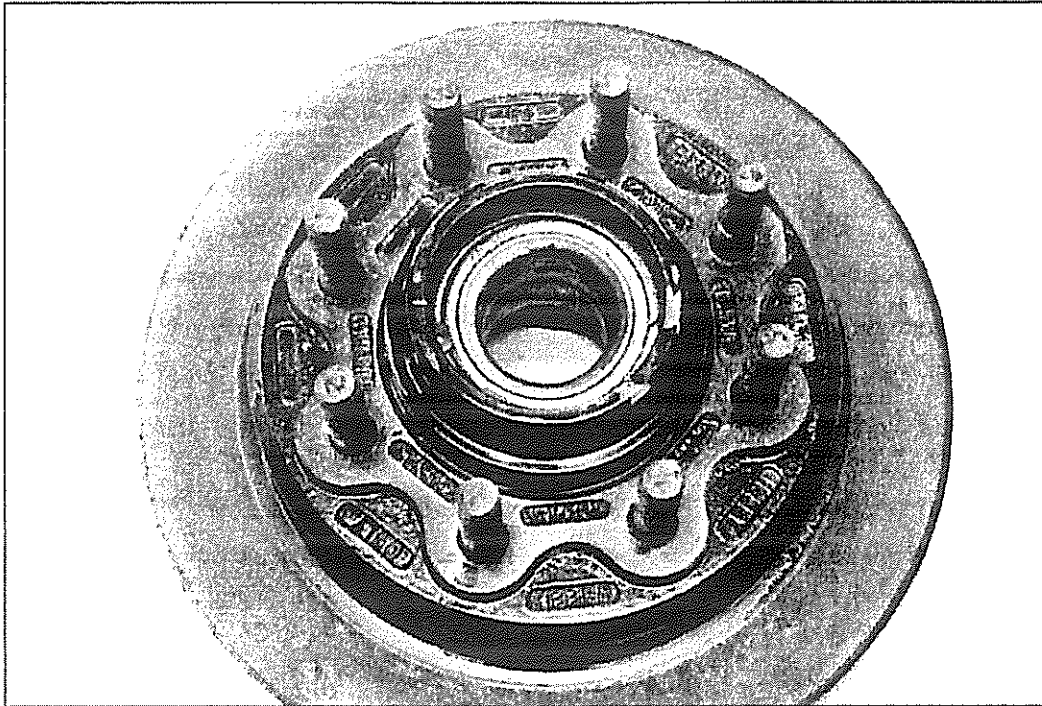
Rotor 3 -- showing paint on the entire mounting face and on the cast face
